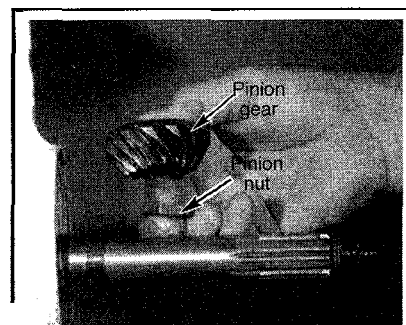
Install the pinion gear and then carefully thread the nut by slowly turning the driveshaft
